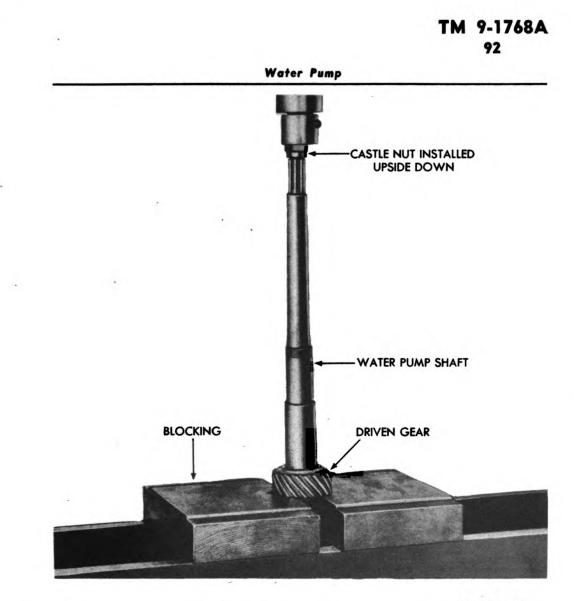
Set-up for Removing Bearing From Water Pump Shaft, Using Special Remover (41-R-2374-435)
